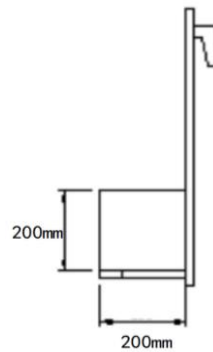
Side View Design Diagram of the Steel Hanging Plate
